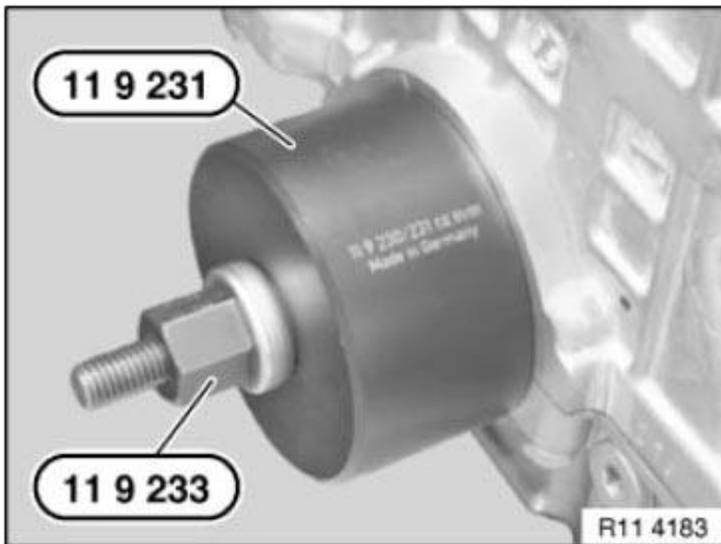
Inserting Radial Seal With Special Tool 11 9 231 And 11 9 233
